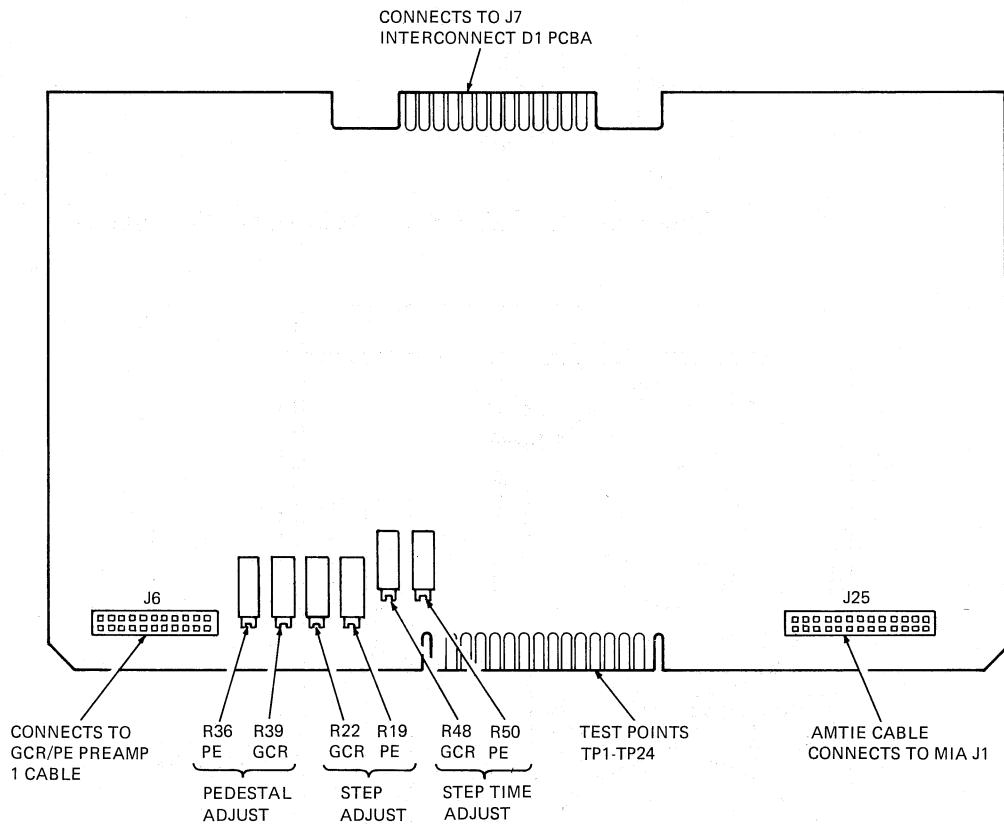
Write PCBA Test Points, Adjustments, and Connectors
